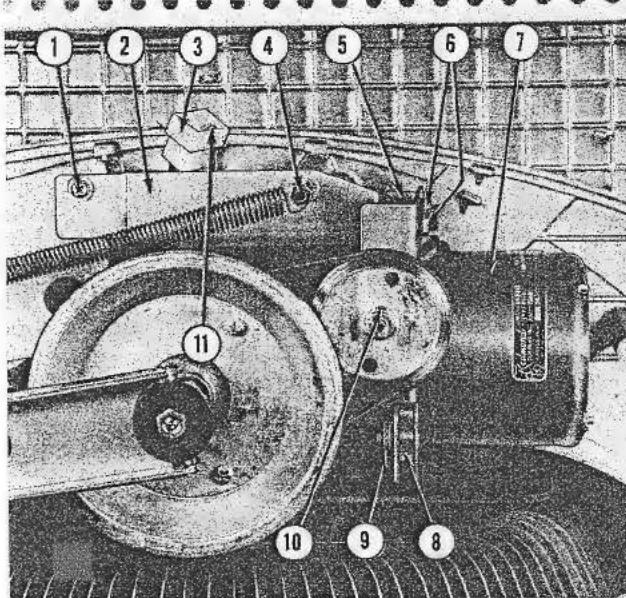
TURNTABLE MOTOR MOUNTING AND BELT ADJUSTMENT
